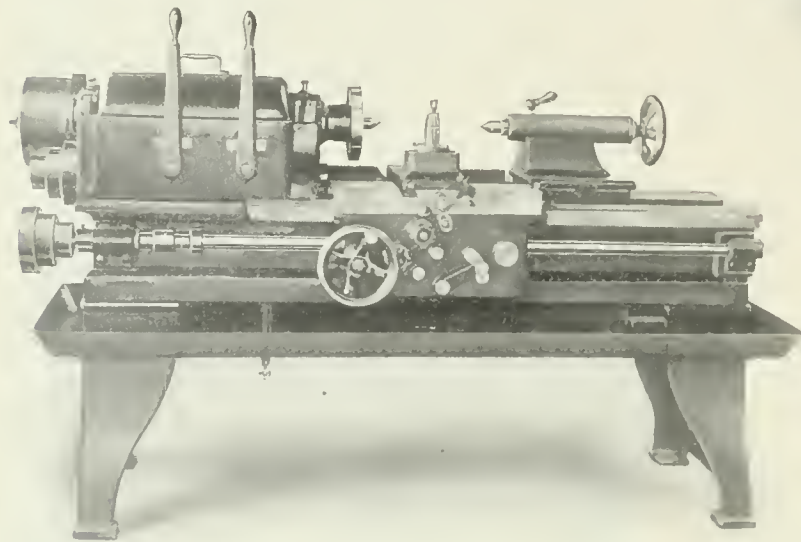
Fay & Scott 16-inch Geared Head Lathe
